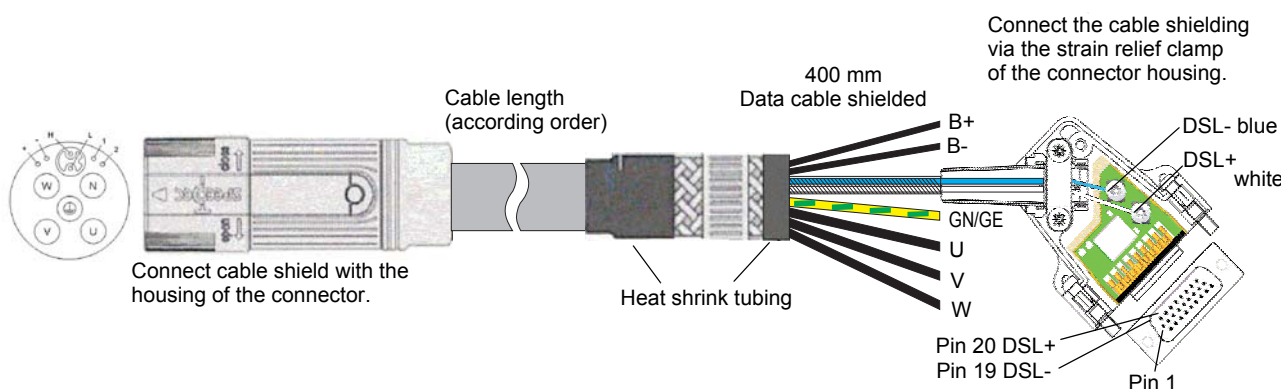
Motor cable with HIPERFACE DSL® 36 A
